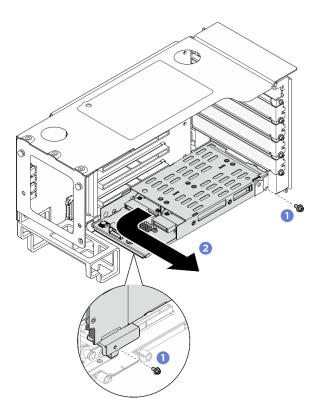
Removing the M.2 drive cage from the six-slot FH riser
